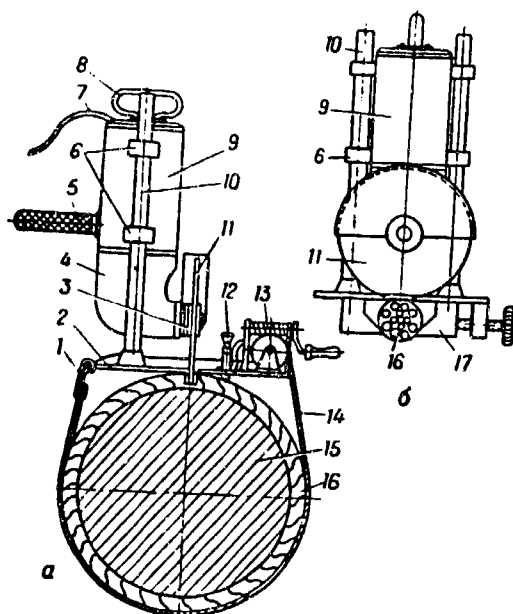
Cutting a Cable with a Circular Power Saw: a - wound on propeller shaft; b - freely suspended; 1 - snap hook on line; 2 - base of supports; 3 - maximal torque clutch; 4 - reducing gear; 5 - handle; 6 - lugs on motor frame; 7 - current-conducting cable; 8 - handle; 9 - electric motor; 10 - guide posts; 11 - abrasive wheel; 12 - lateral support of post; 13 - hand winch; 14 - line; 15 - propeller shaft; 16 - cable which is being cut; 17 - jaws for gripping cable being cut.
